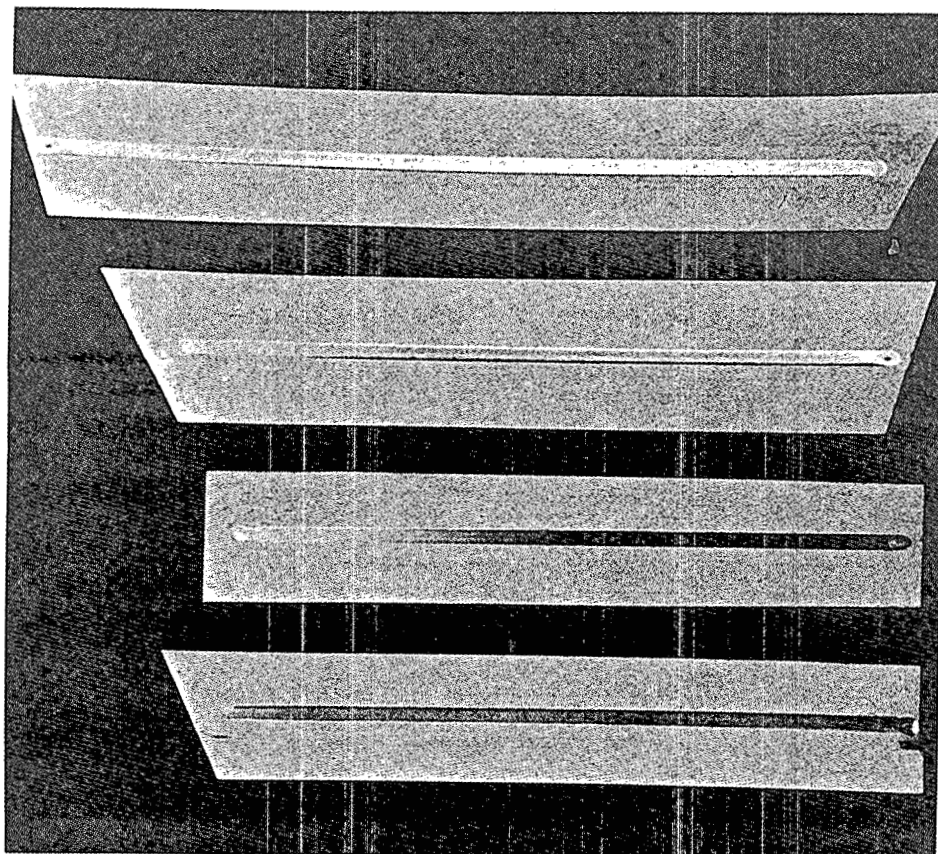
Bead-on-plate GTA welds on 0.030-inch powder metallurgy W-25Re-30Mo alloy sheet.
